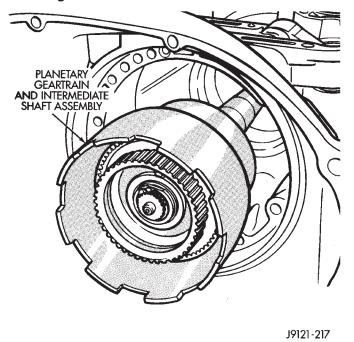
Removing Planetary Geartrain And Intermediate Shaft Assembly
